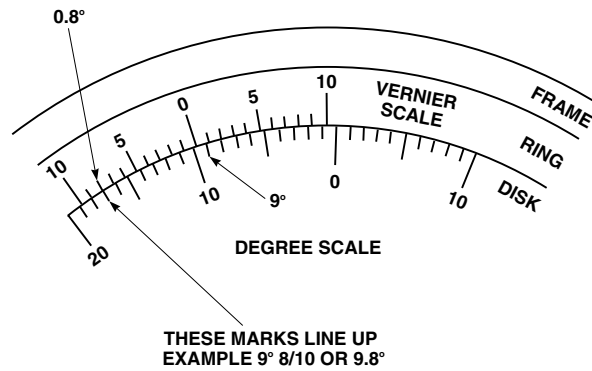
MEASURE BLADE ANGLE USING UNIVERSAL PROPELLER PROTRACTOR (SHEET 1 OF 2)
